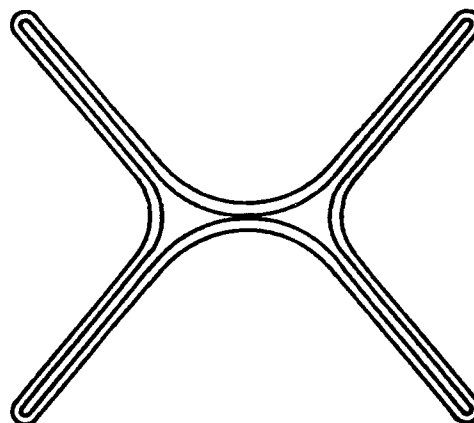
Drawing of 91 taper ice cleat design for the M1A1 T158 track.
